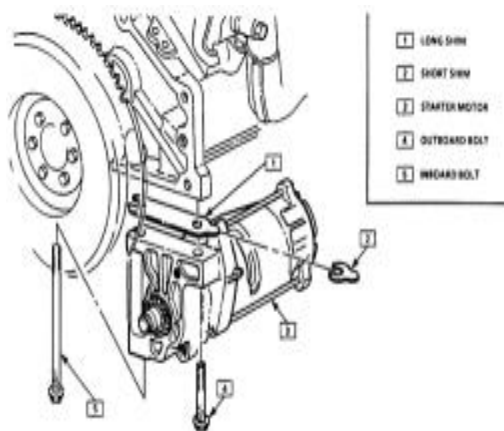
Exploded view of the starter motor mounting—5.7L (VIN P & 5) engines
